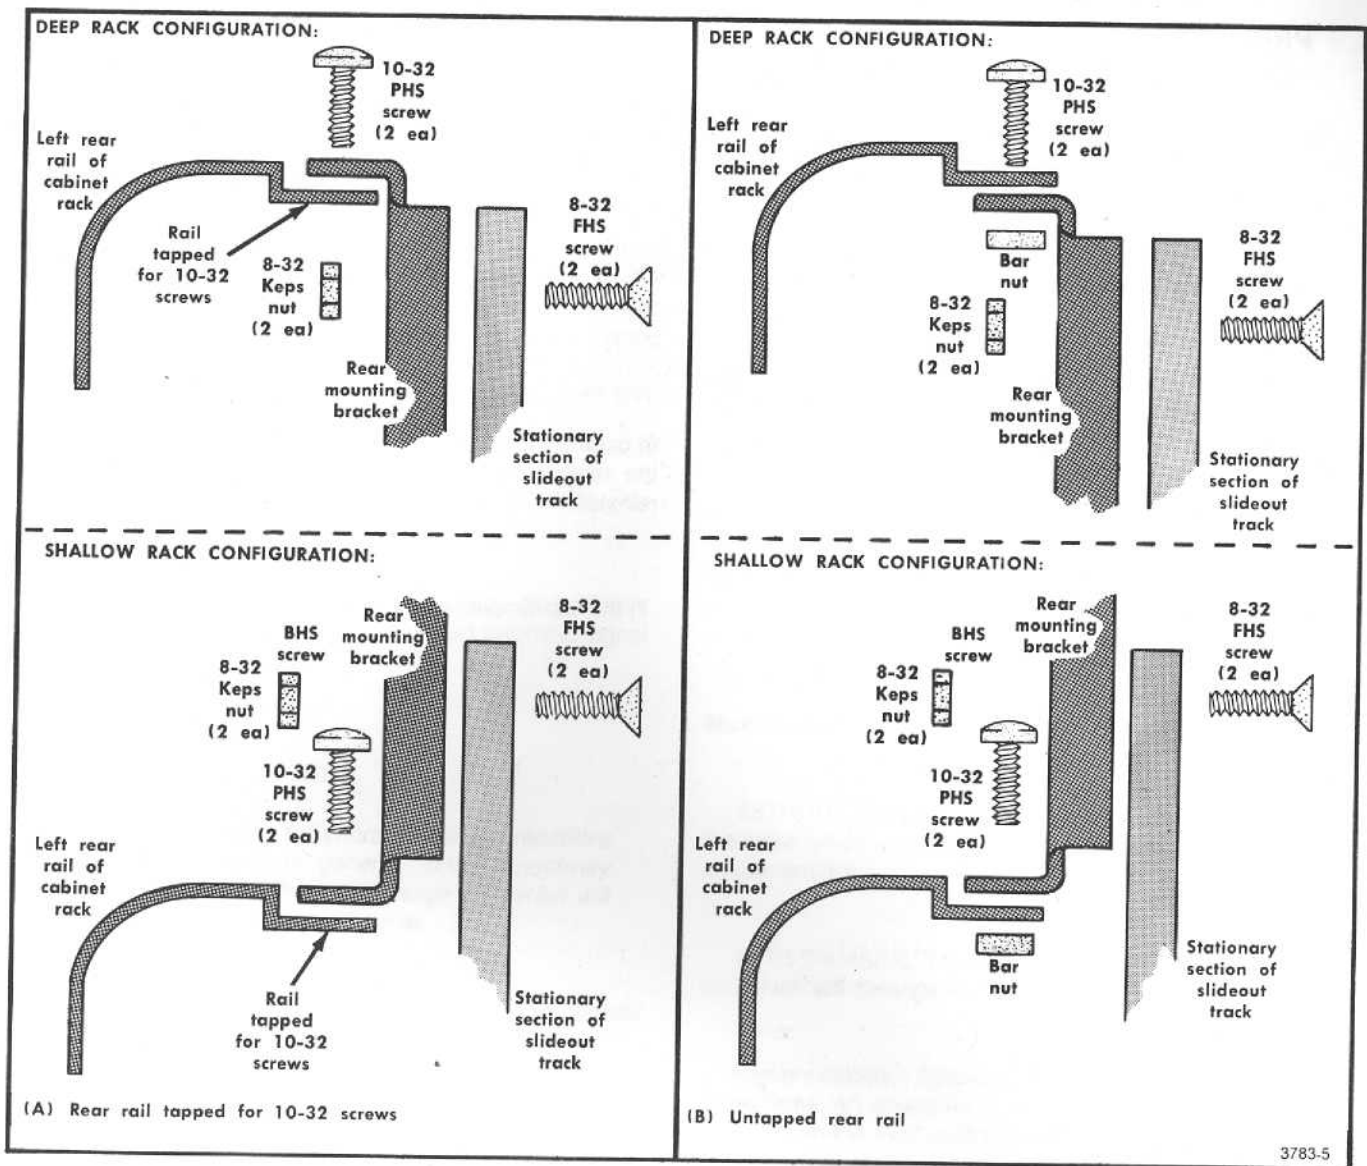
Alternative method of installing the instrument using rear support brackets.
